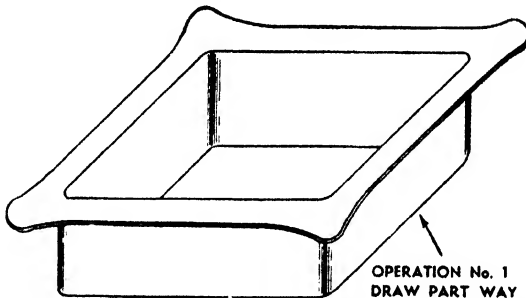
Stamping at the end of first draw, ready for notching of the flange.
